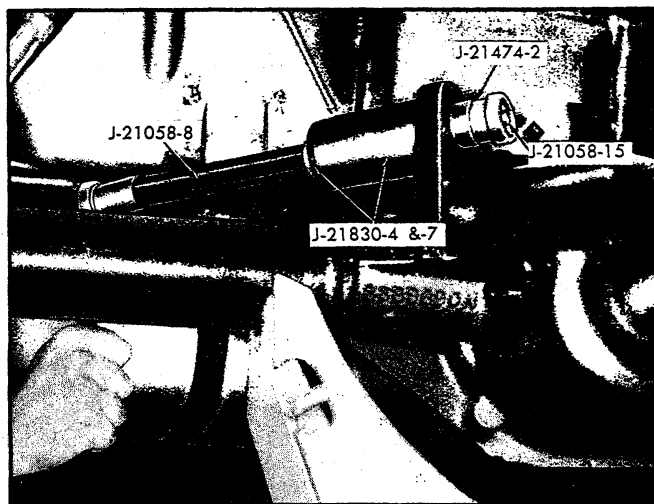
Carrier Mounted Suspension Bushing Removal (Light-Duty) (Chevelle)
